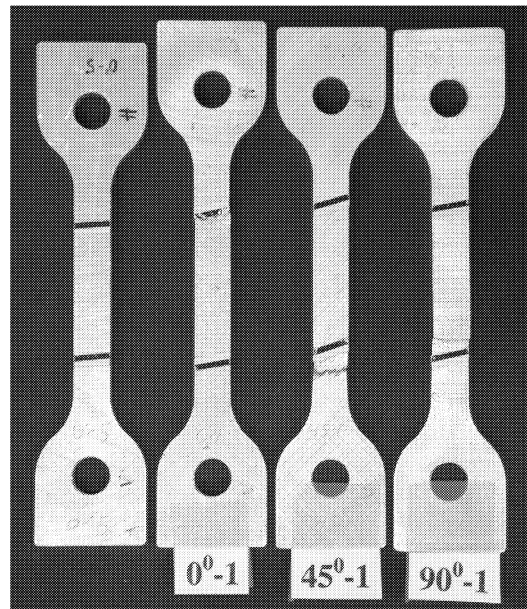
Fractured specimens: 0° -1, 45° -1, 90° -1, and a virgin specimen (series A).
